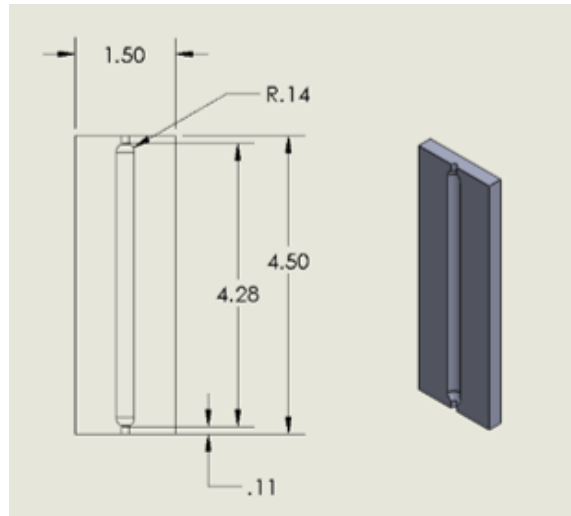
A dimensioned drawing of the mold that will be used to create polyethylene specimens.
